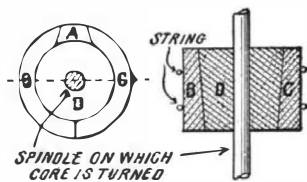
THE CORE MADE IN FOUR PIECES.
